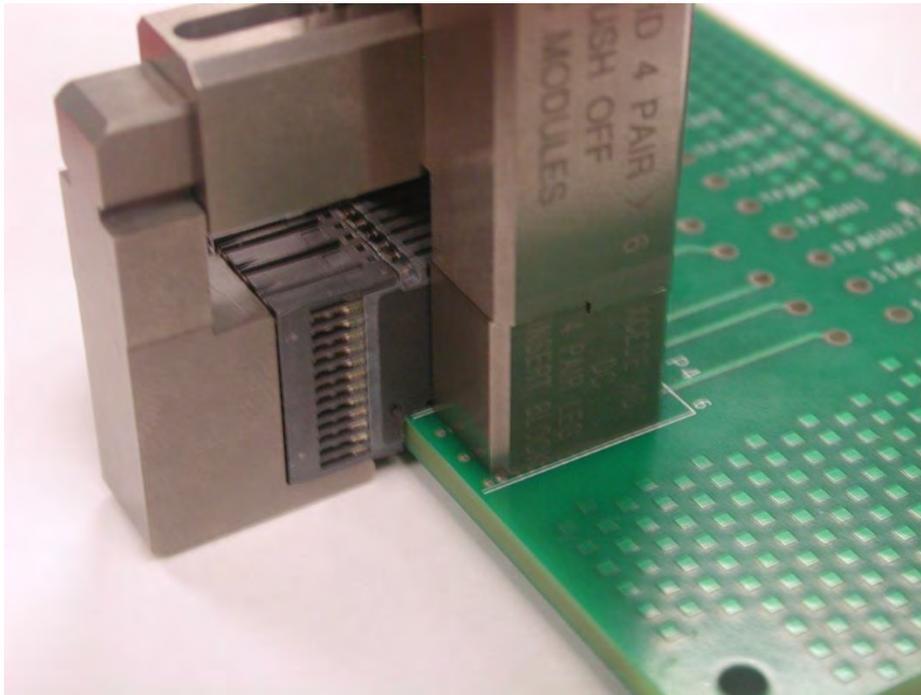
Daughtercard Module Removal Using 'Push Off DC Modules' and 'Leg Insert Block' Configuration
